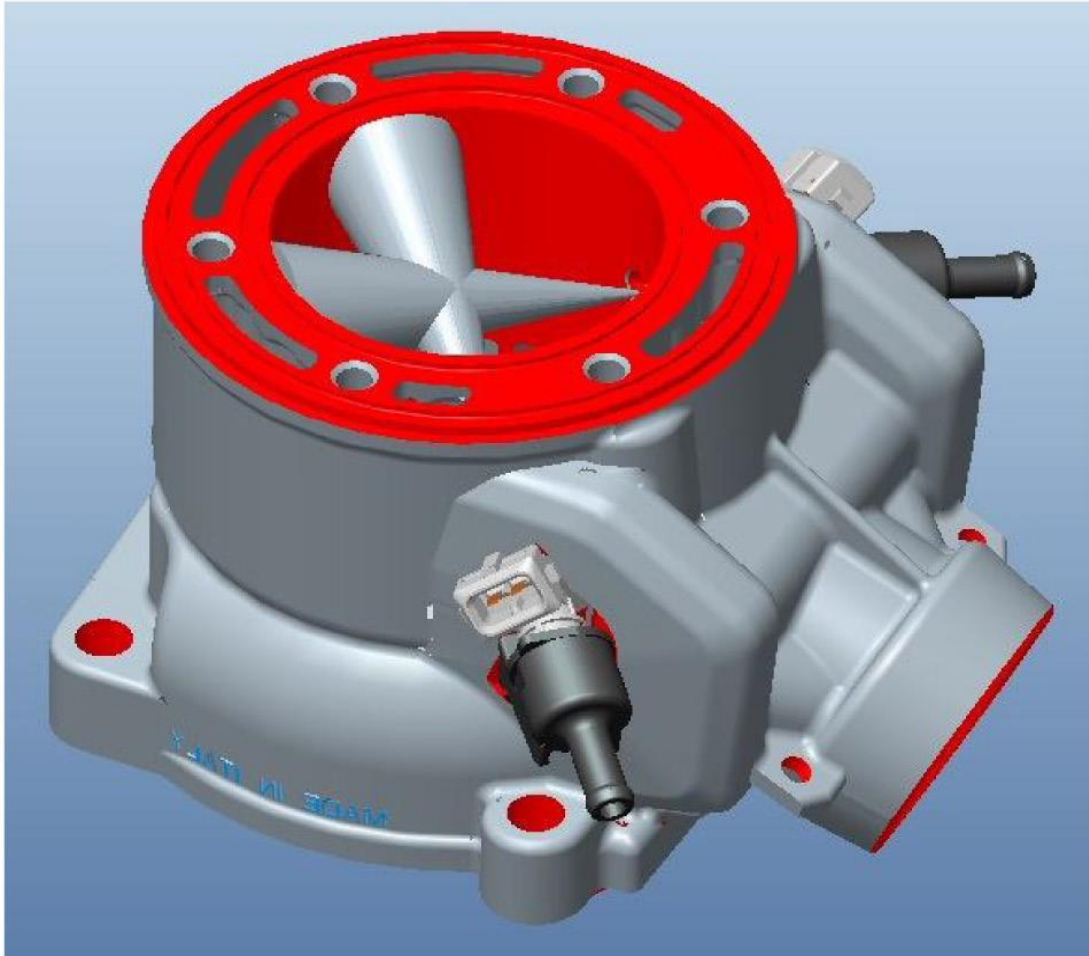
CAD model of the cylinder modified with the injectors' housings.(Balduzzi et al. 2015)
